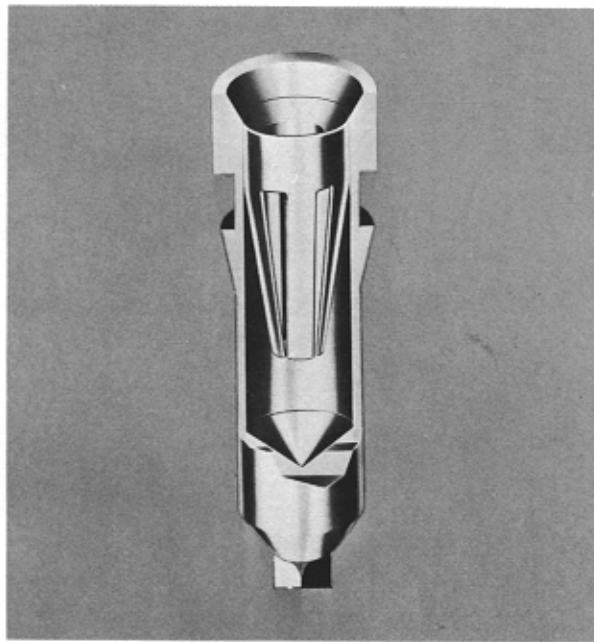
Cut-away view exposing contact configuration of Augat wide-angle tapered entry socket terminal
